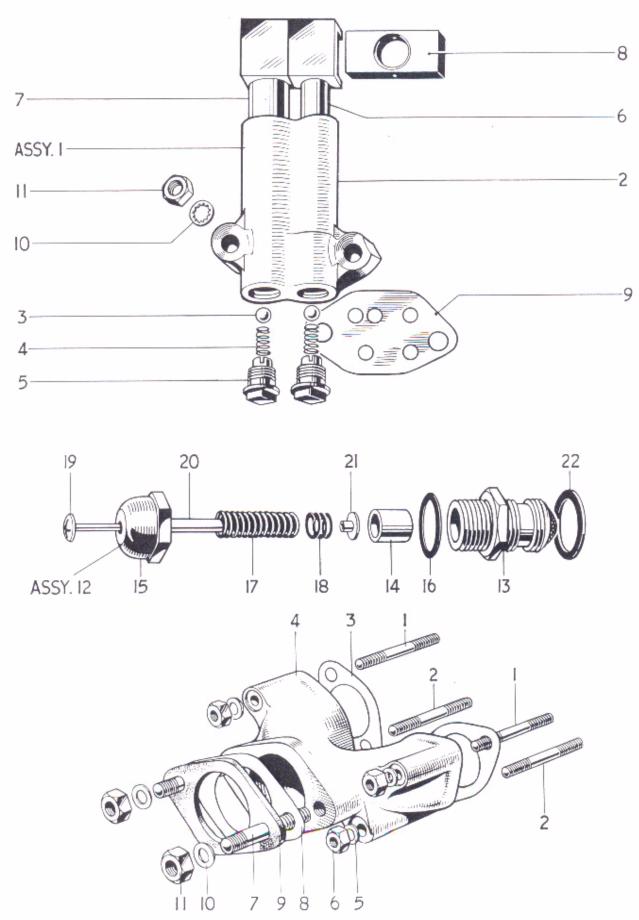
OIL PUMP, RELEASE VALVE AND INLET MANIFOLD.
